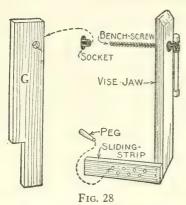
The Board G Forms a Pocket for the Vise Sliding-Strip.
